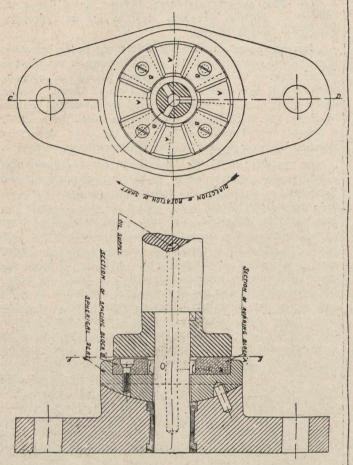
Special Design of a Michell Bearing Applied to a Steam Turbine.
